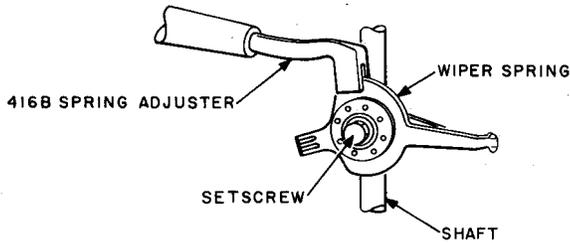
Method of Adjusting Spring Tension Commutator Wiper
